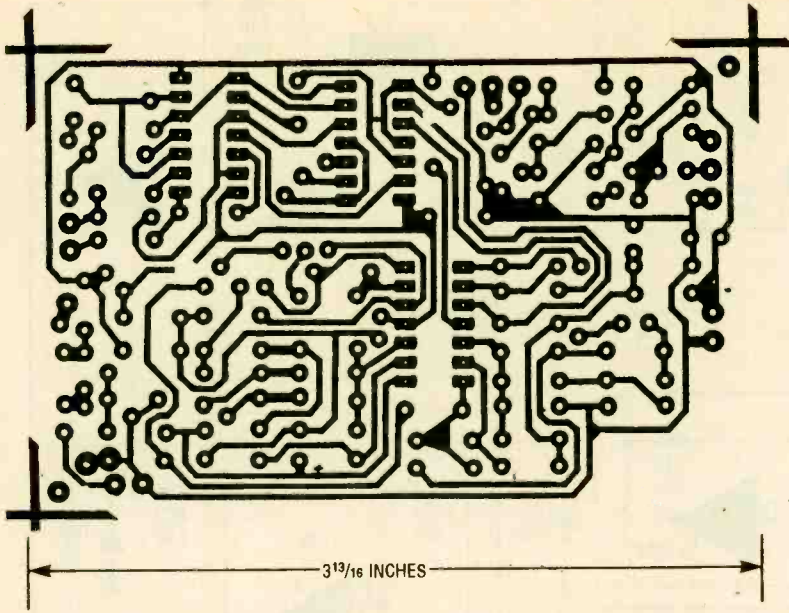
The Voice Disguiser was built on a printed-circuit board, measuring about 3¹³/₁₆ by 2⁷/₁₆ inches. A template of that printed-circuit layout is shown here full size for those of you who wish to etch your own printed-circuit board. If you prefer, you can purchase a kit of parts (including a pre-drilled printed-circuit board) or the board alone from the supplier listed in the Parts List.
